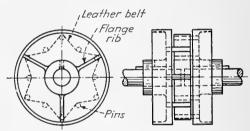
This Webster Manufacturing Company coupling uses a single endless leather belt instead of a series of bands, as in Fig. 276. The belt is looped over alternate pins in both flanges. This type has good shock-resisting properties because of belt stretch and the tendency of the pins to settle back into the loops of the belt.
